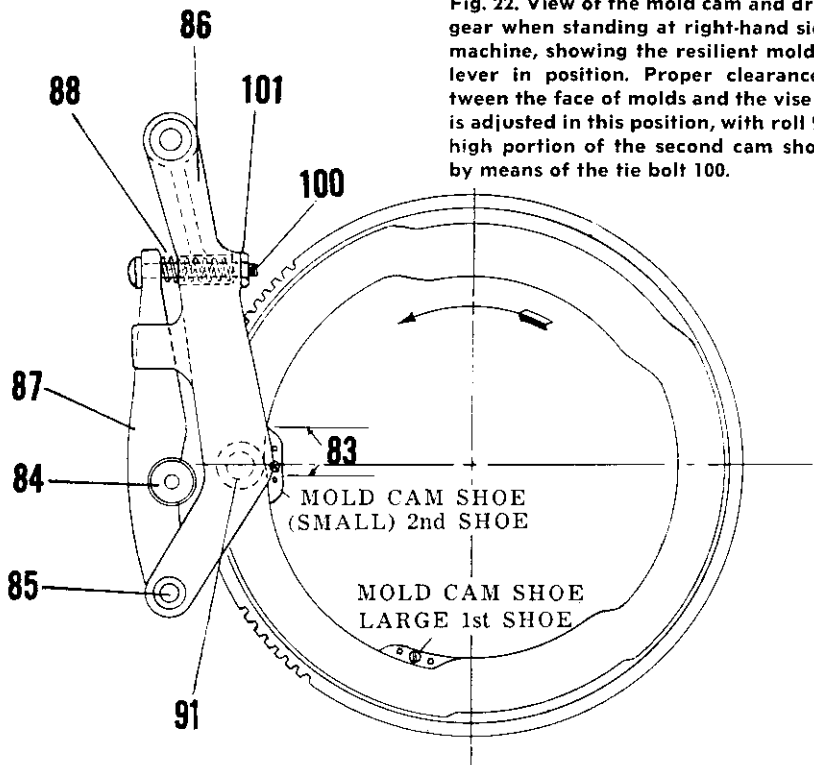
View of the mold cam and driving gear when standing at right-hand side of machine, showing the resilient mold cam lever in position. Proper clearance between the face of molds and the vise jaws is adjusted in this position, with roll 91 on high portion of the second cam shoe 83, by means of the tie bolt 100.
